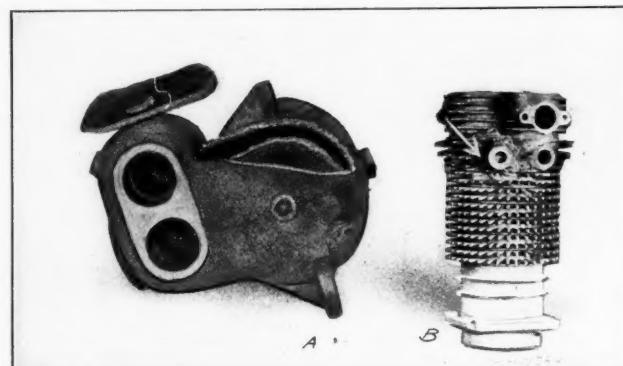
Cylinder Cracked in Inner Wall, showing Large Section of Outer Wall removed to weld the Crack.
